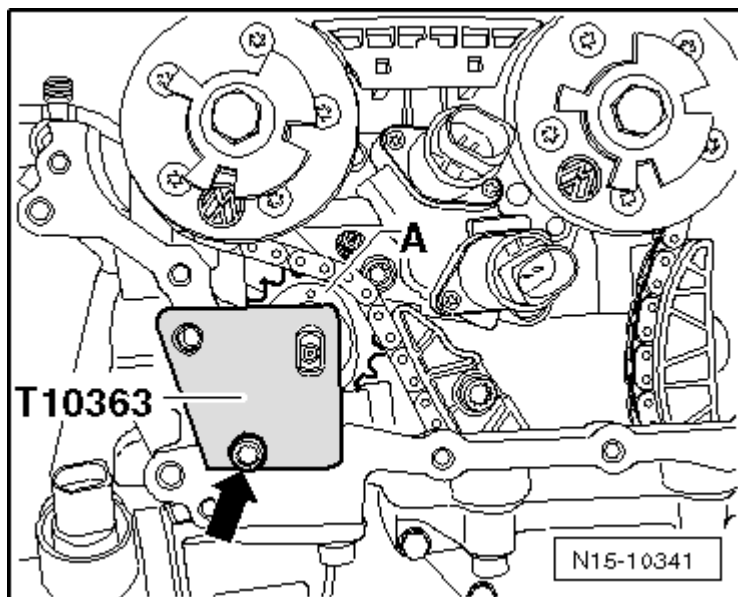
Securing Position Of Drive Pinion For High Pressure Pump Using Adjustment Tool T10363
